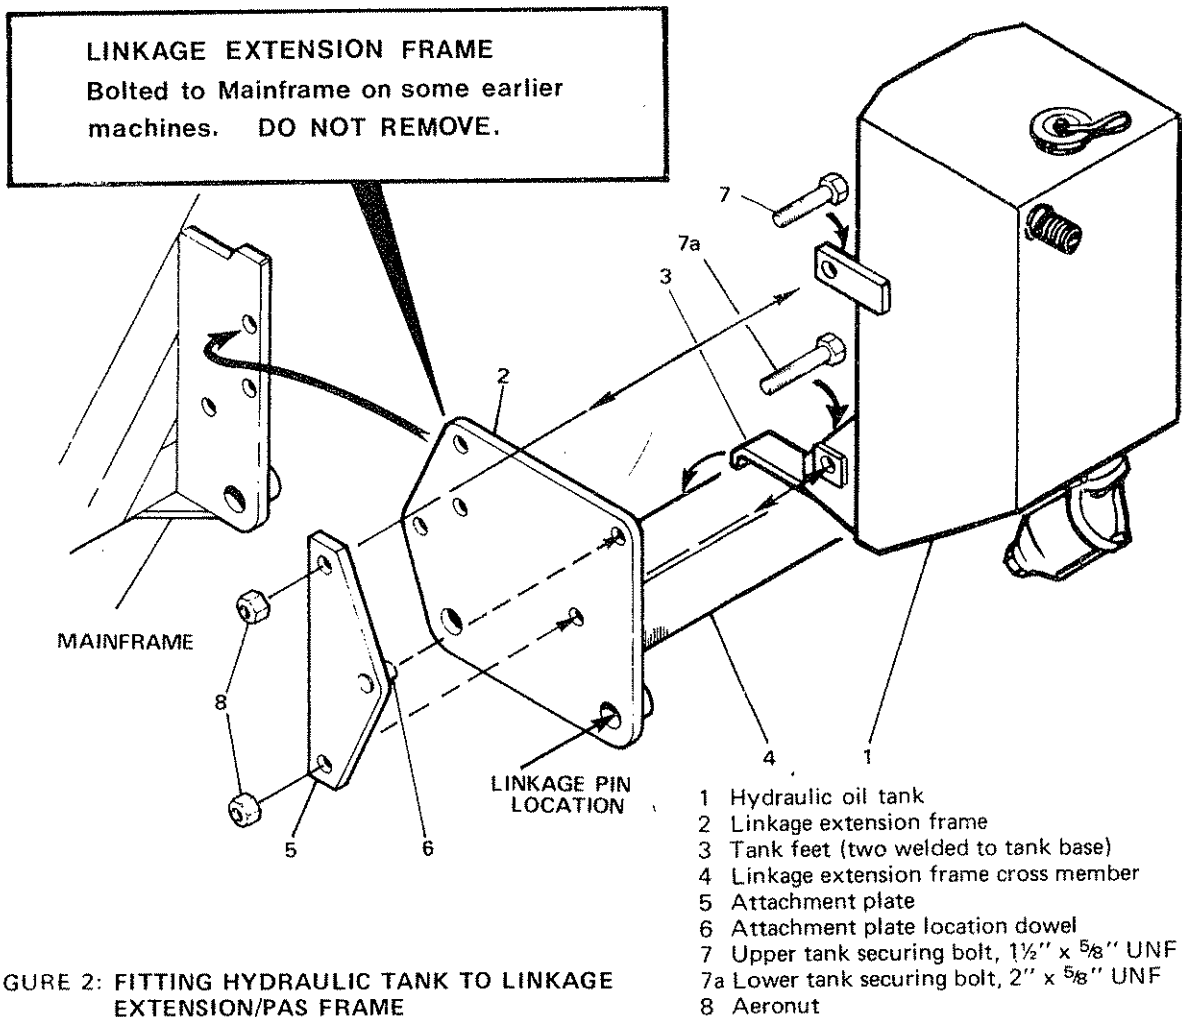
FITTING HYDRAULIC TANK TO LINKAGE EXTENSION/PAS FRAME
